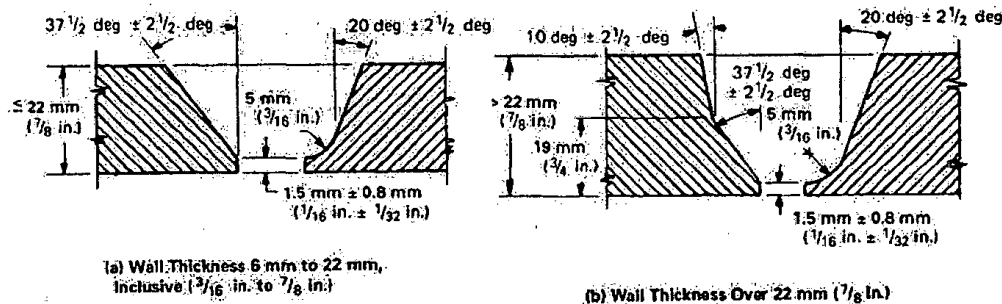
TYPICAL BUTT WELD END PREPARATION
